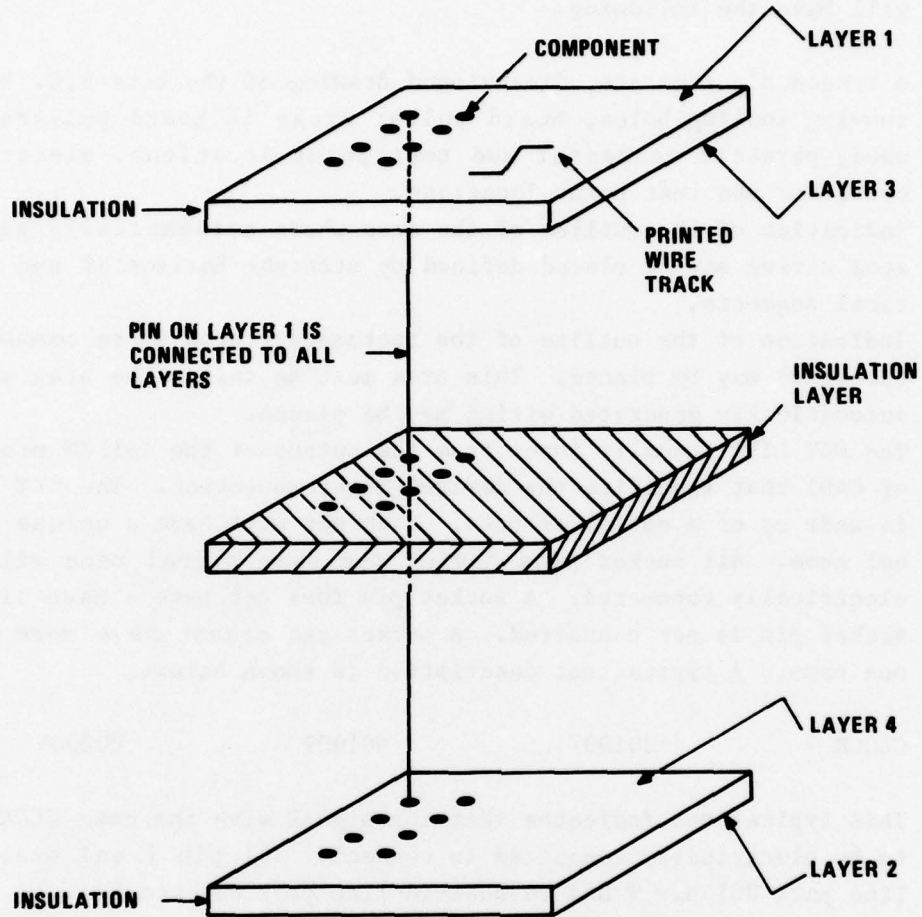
Exploded View of a Typical Multilayer Board
